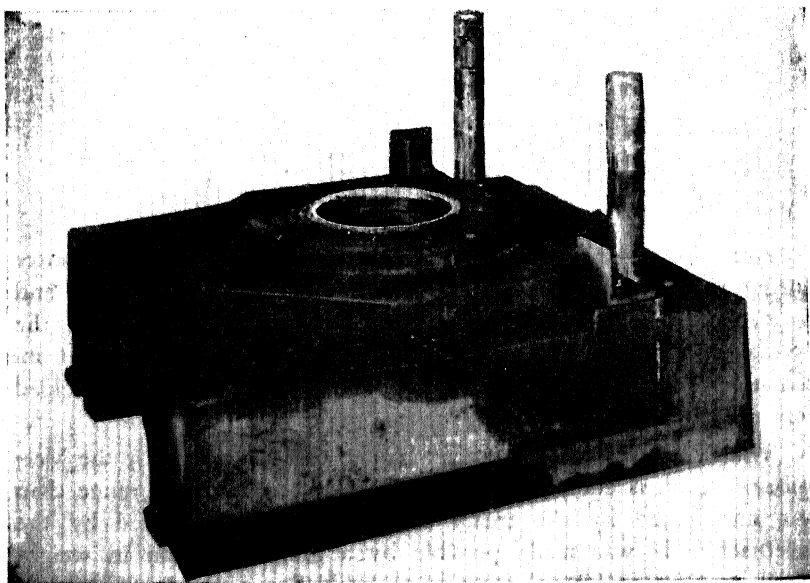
Blanking die, built from mild steel plate, hard-faced with tool steel electrode around cutting edge, ground to proper dimensions and welded to die base. Applications such as this save 50% over conventional method of using tool steel throughout.
